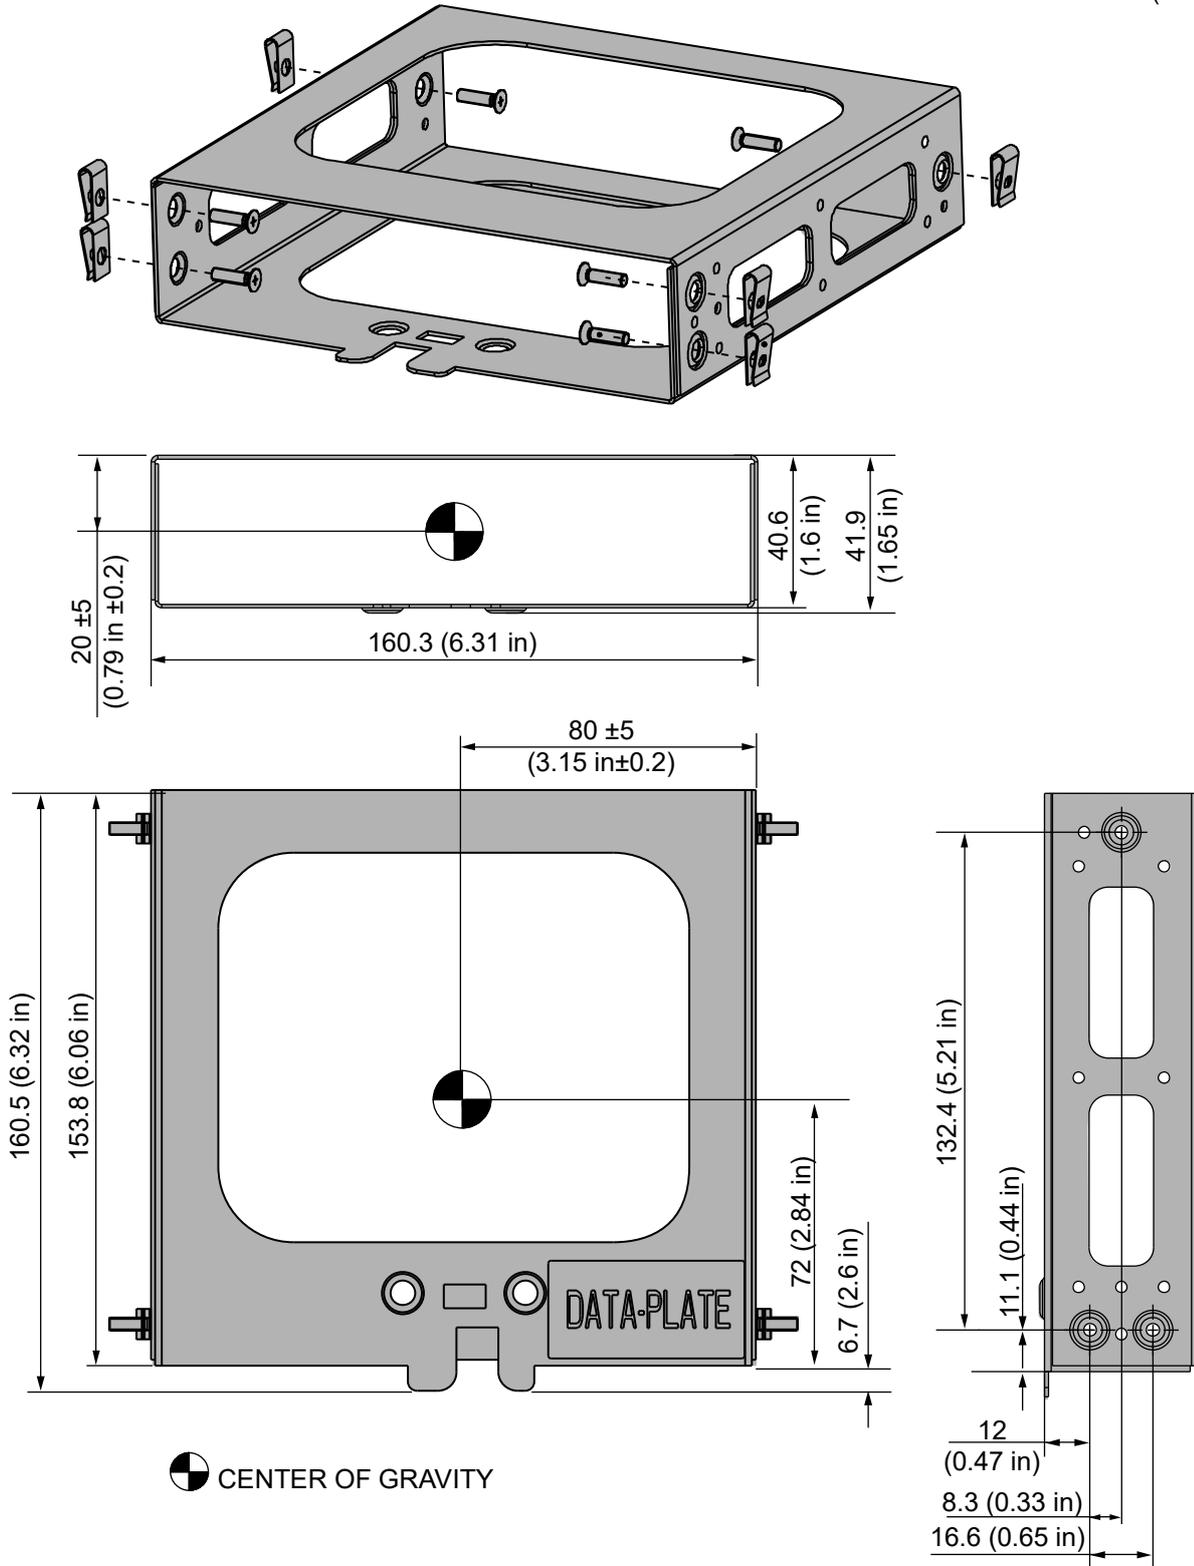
Dimensions Mounting kit MK6403-1 (for AR6203)
